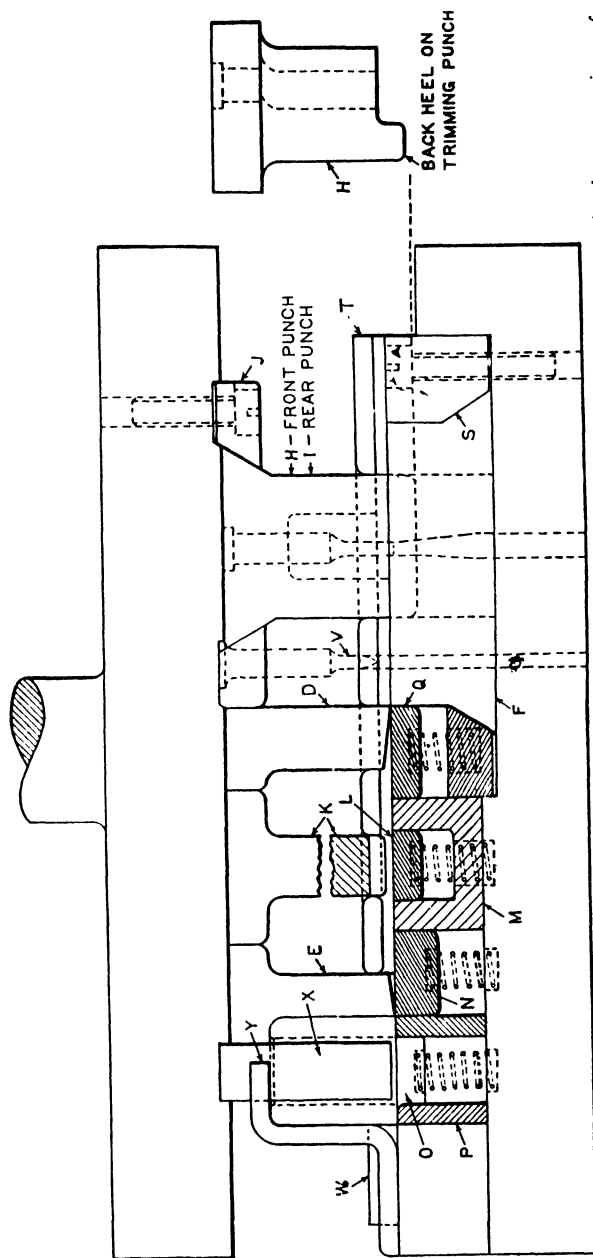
Progressive die that can be adjusted to produce four different sizes of frames, which are shown in the upper views of Fig. 97.
